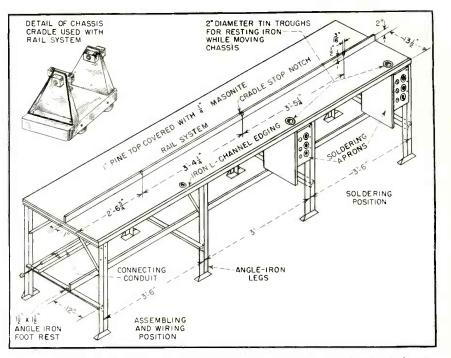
Design of standard workbench for receiver assembly, and details of chassis cradle that rolls along bench guided by rail in center. Back of bench is used for storage of parts and for preparatory operations like cutting and bending wires
